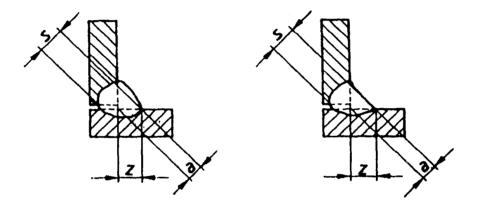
METHODS OF INDICATING DIMENSIONS FOR FILLET WELDS
